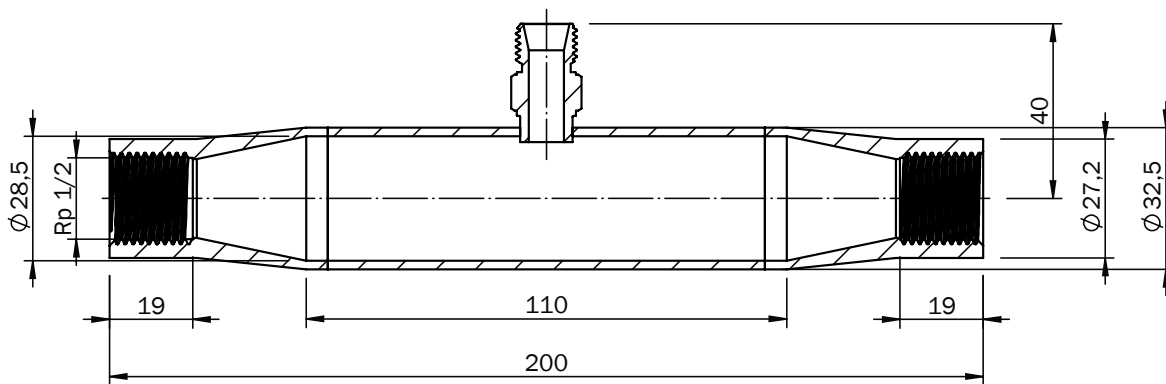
Caption: Dimensional drawing for T-piece DN15 (P/N 2123463) with Rp thread
